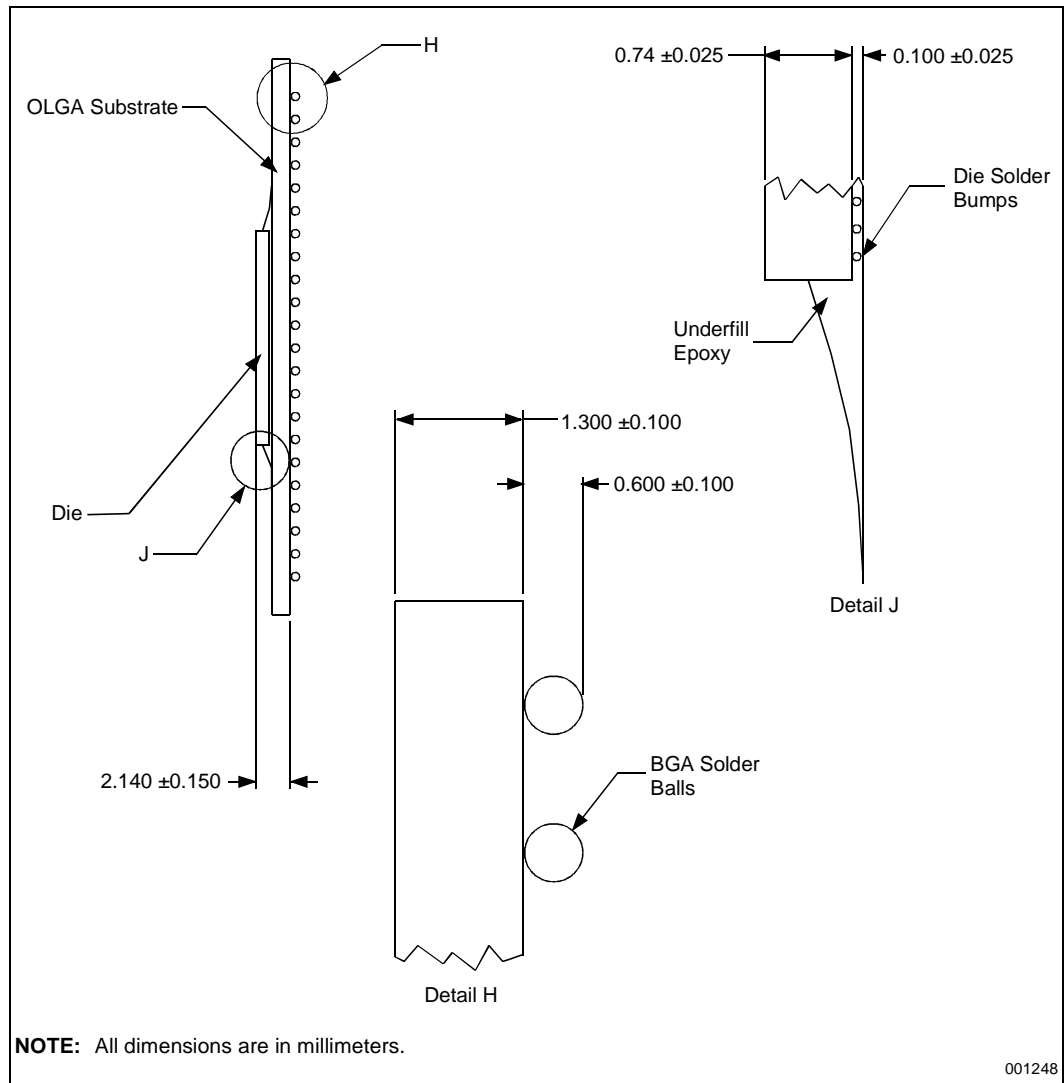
1012-Ball OLGA2b Solder Ball Detail
